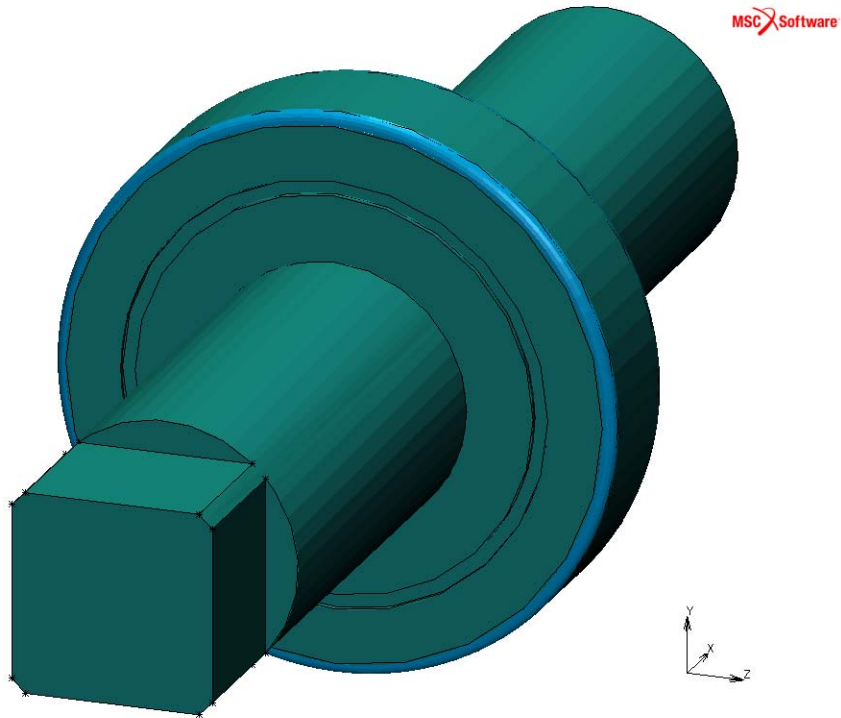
Bearing Model After Fillets Have Been Removed
